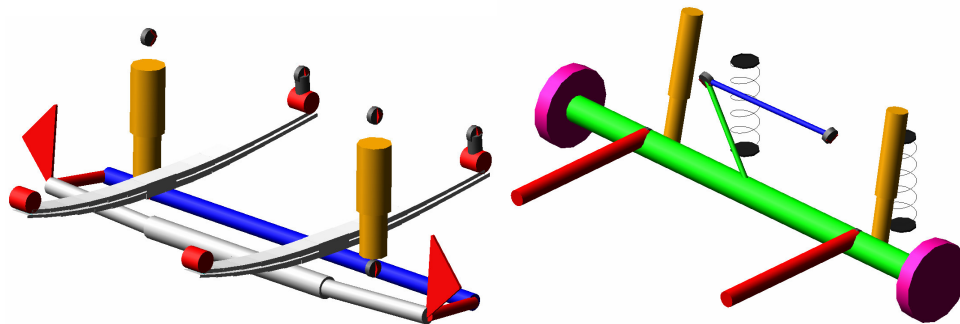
Tractor front suspension with leaf springs (l) and drive axle (r).
